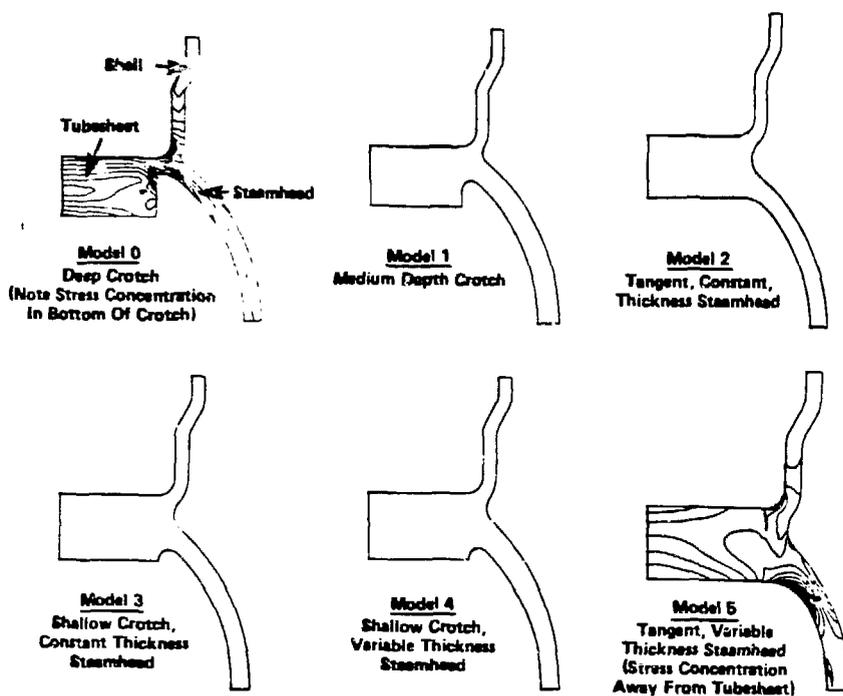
INTEGRAL STEAMHEAD/TUBESHEET CONCEPTS
